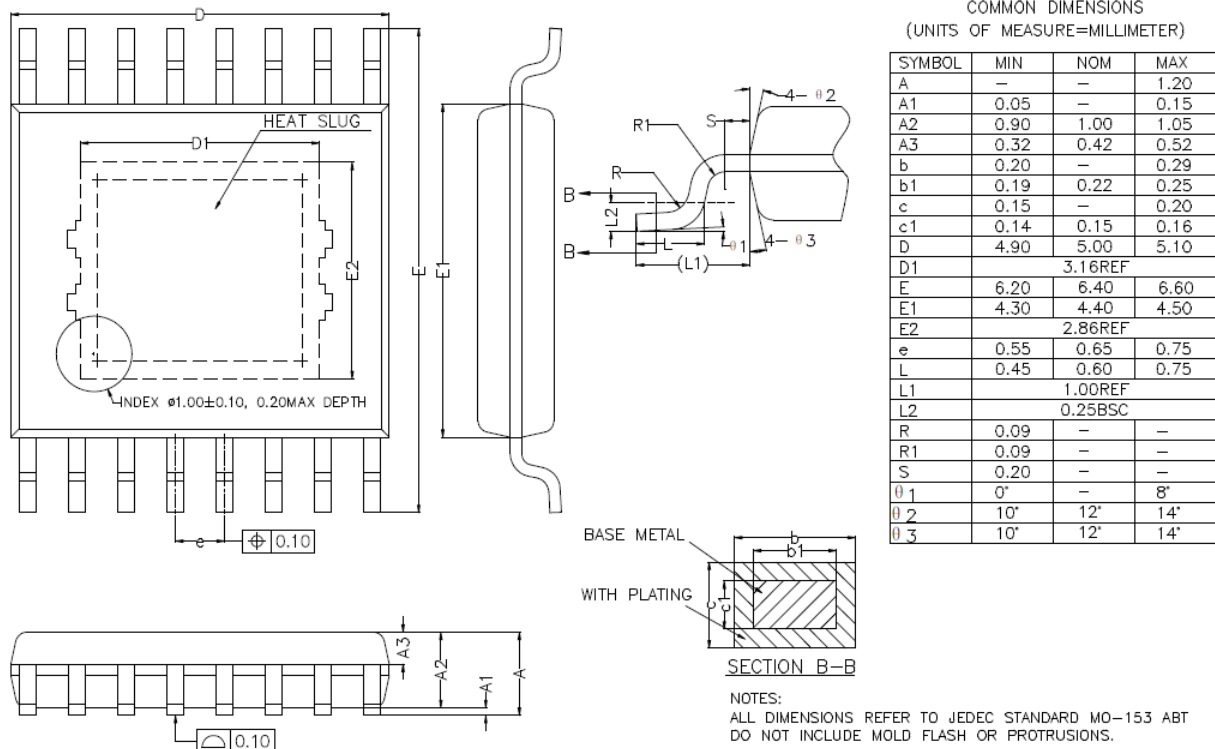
HTSSOP-16 Package Shape and Dimension in millimeters
